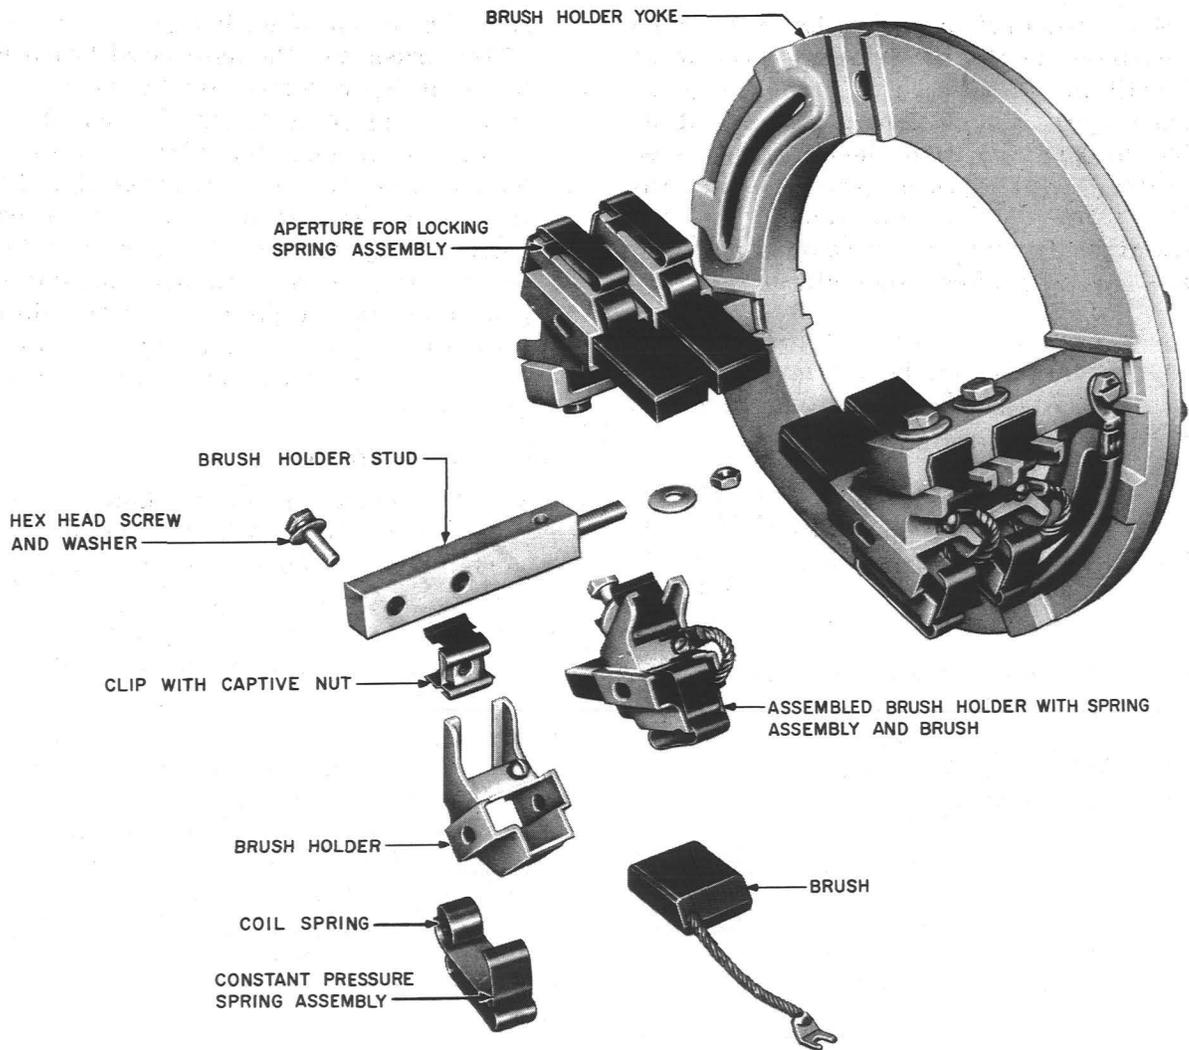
Yoke, Stud, and Brush Holder Assembly
